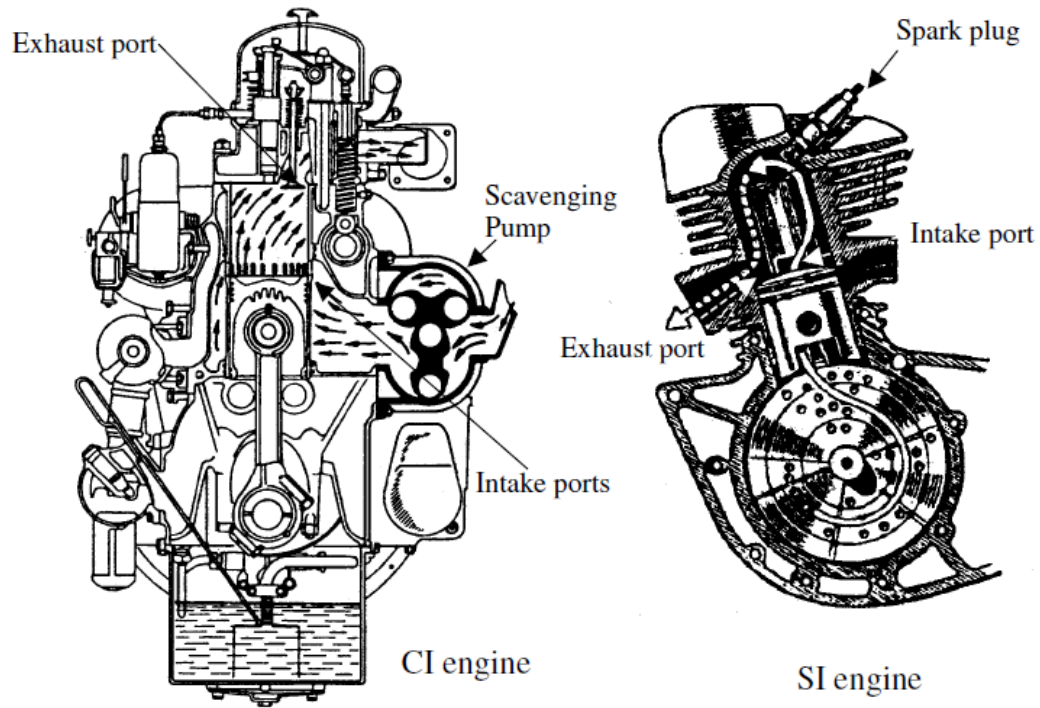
Examples of 2-stroke engines. A diesel engine with a blower to aid scavenging (left) and a small SI engine for a scooter or power tool application.
